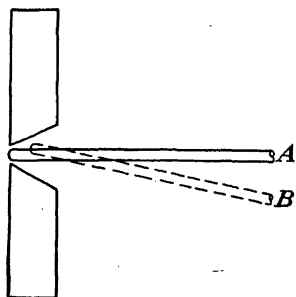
Side view of horizontal butt weld. A. Position of electrode on first pass. B. Position of electrode on third pass.
